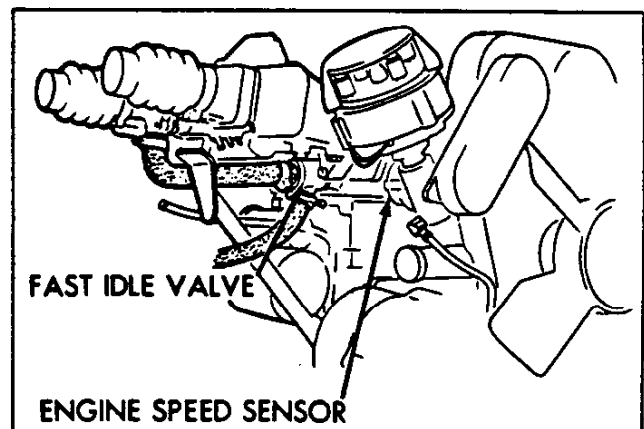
M-5 – Fast Idle Valve & Engine Speed Sensor
